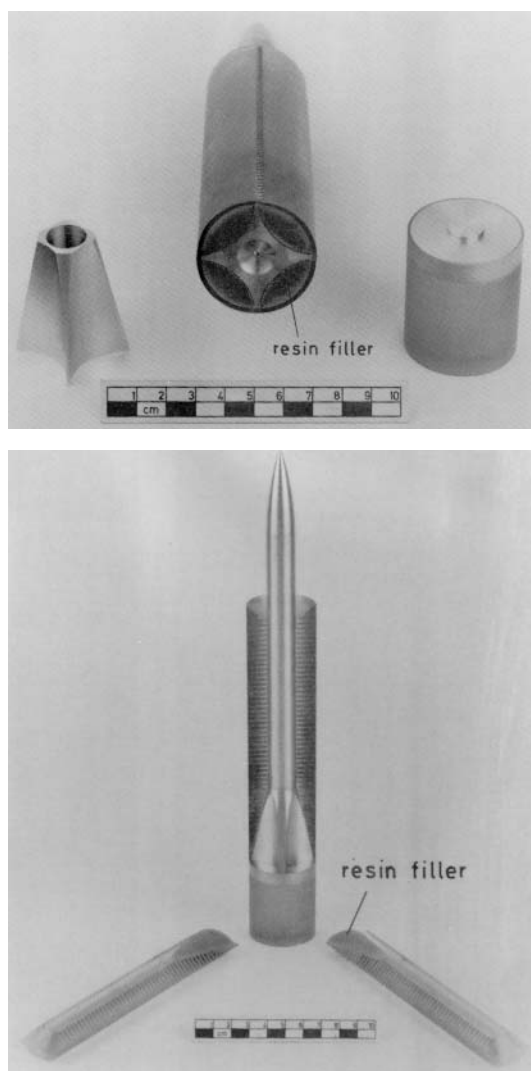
Geopenetrator with sabot. Fin, penetrator with sabot fingers, and pusher (*upper photograph*). Sabot with penetrator (*lower photograph*)
